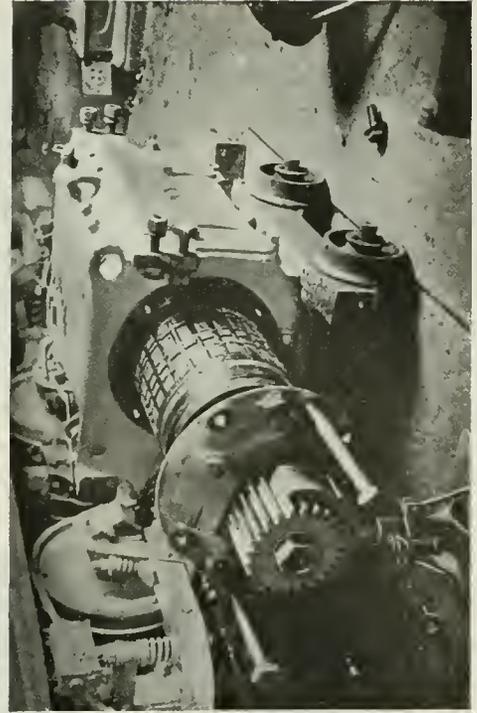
The armature is supported by jacks which can be readily adjusted to take the weight of the armature off the pole pieces
